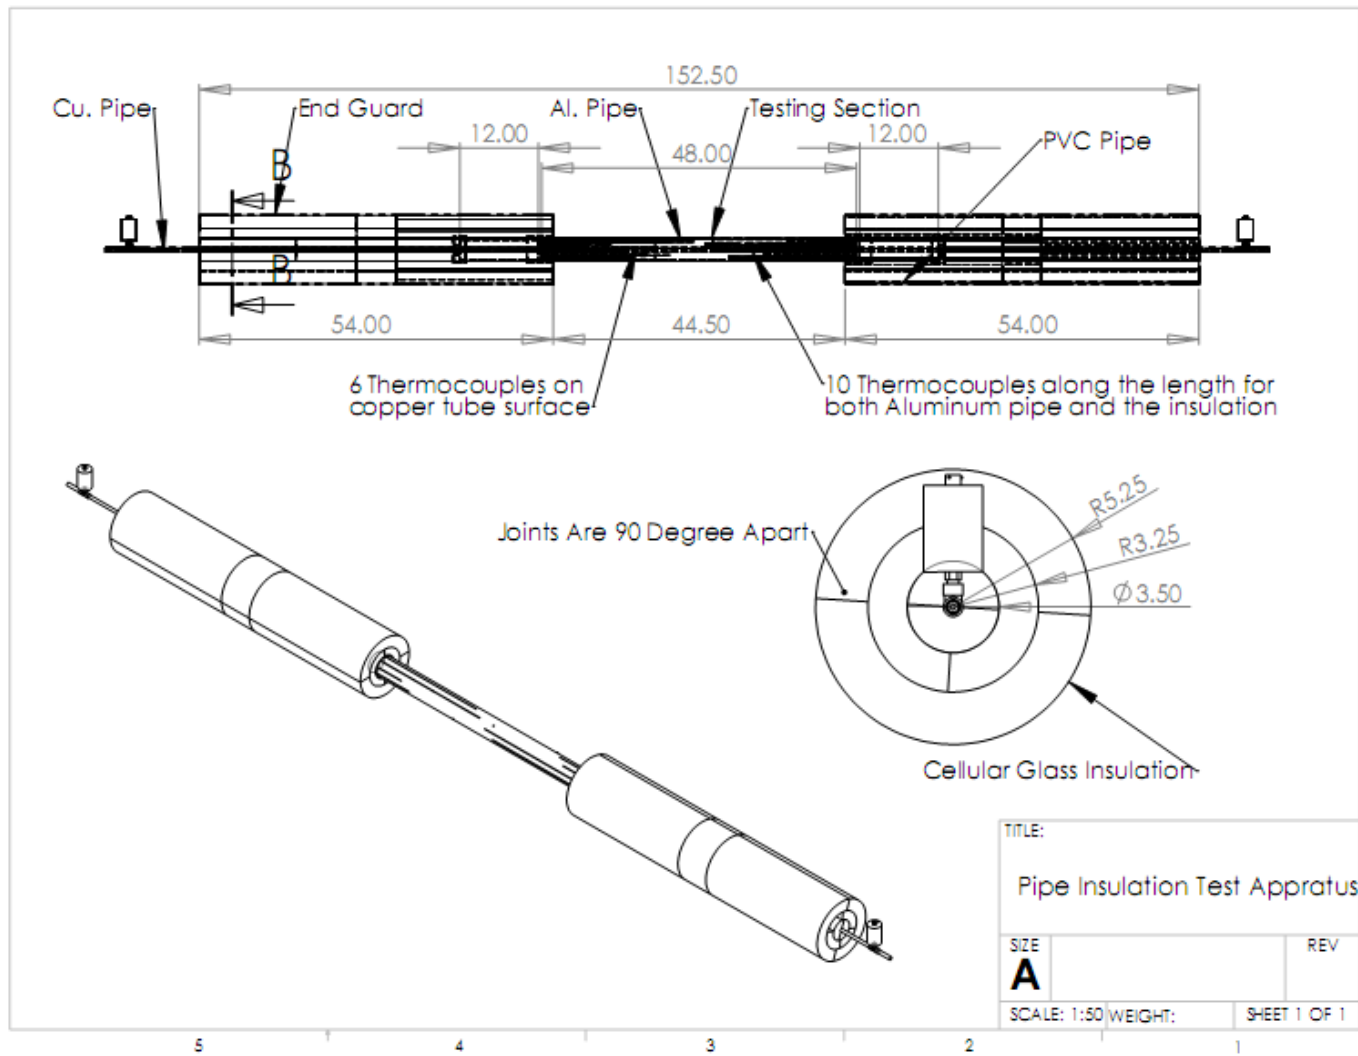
Technical drawings of the Aluminum pipe with two end thermal guard sections (unit: inch)
